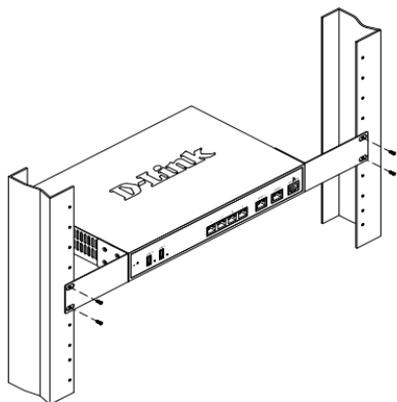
Install the Wireless Controller in a standard-sized equipment rack
